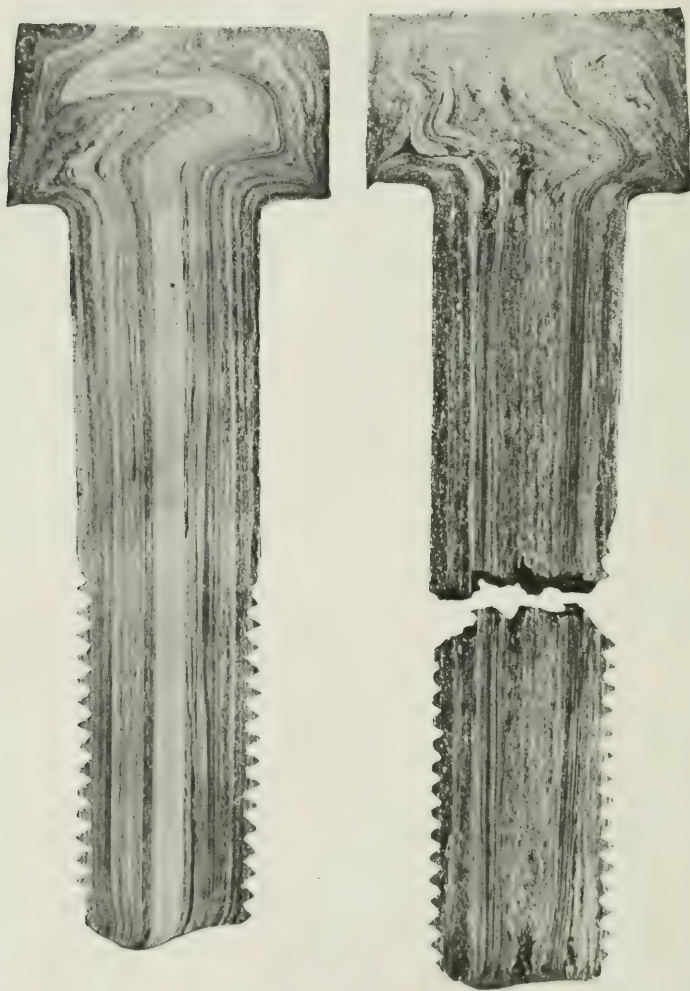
Steel bolts, fractured whilst in use owing to segregation, slag, large crystalline structure and method of manufacture.
